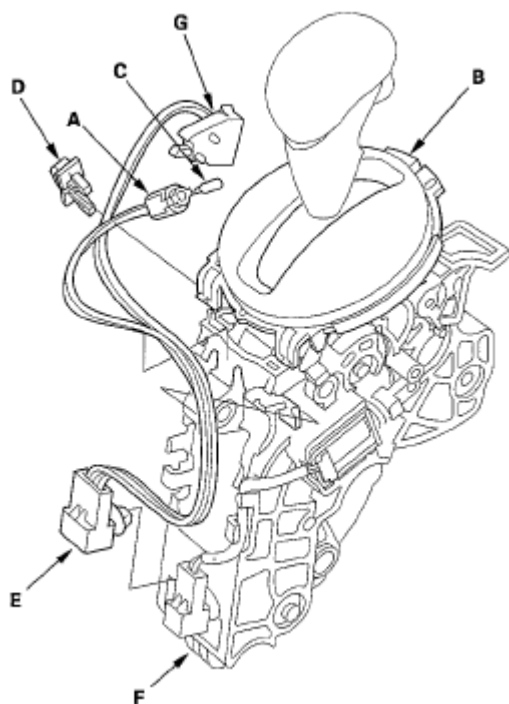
Identifying A/T Gear Position Indicator Panel Light, Socket, Indicator Panel And Light Bulb
